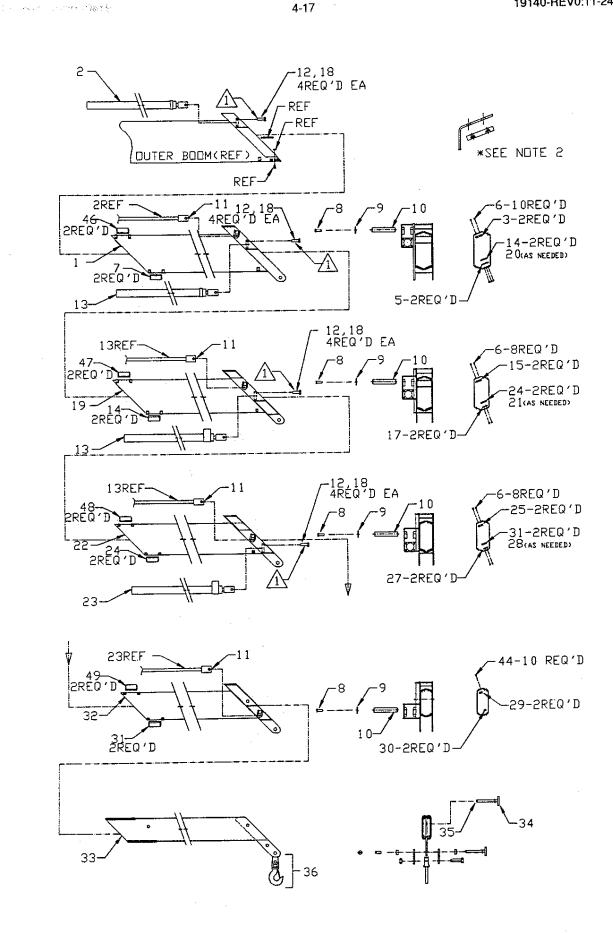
A. EXTENSION BOOM ASSEMBLY - 4H/1M (41710184)
